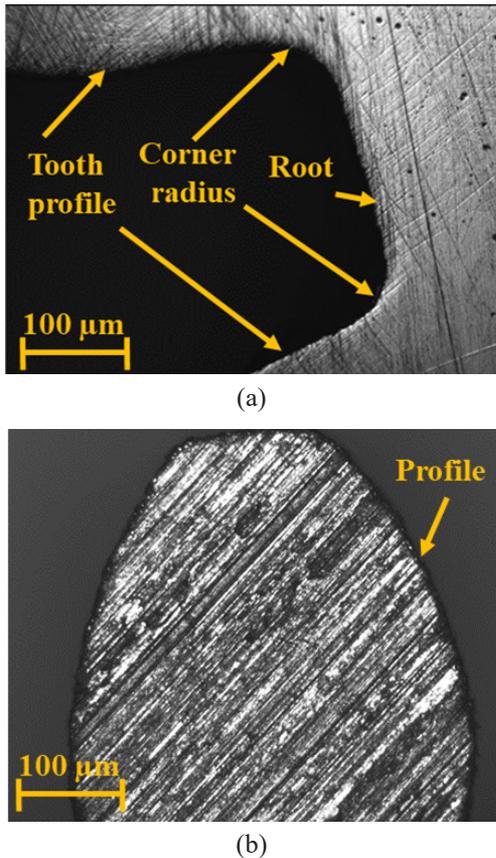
Optical microscopic images of SEWC manufactured best quality aluminum gear: (a) profile of gear tooth at the bottom; and (b) tooth involute profile.
